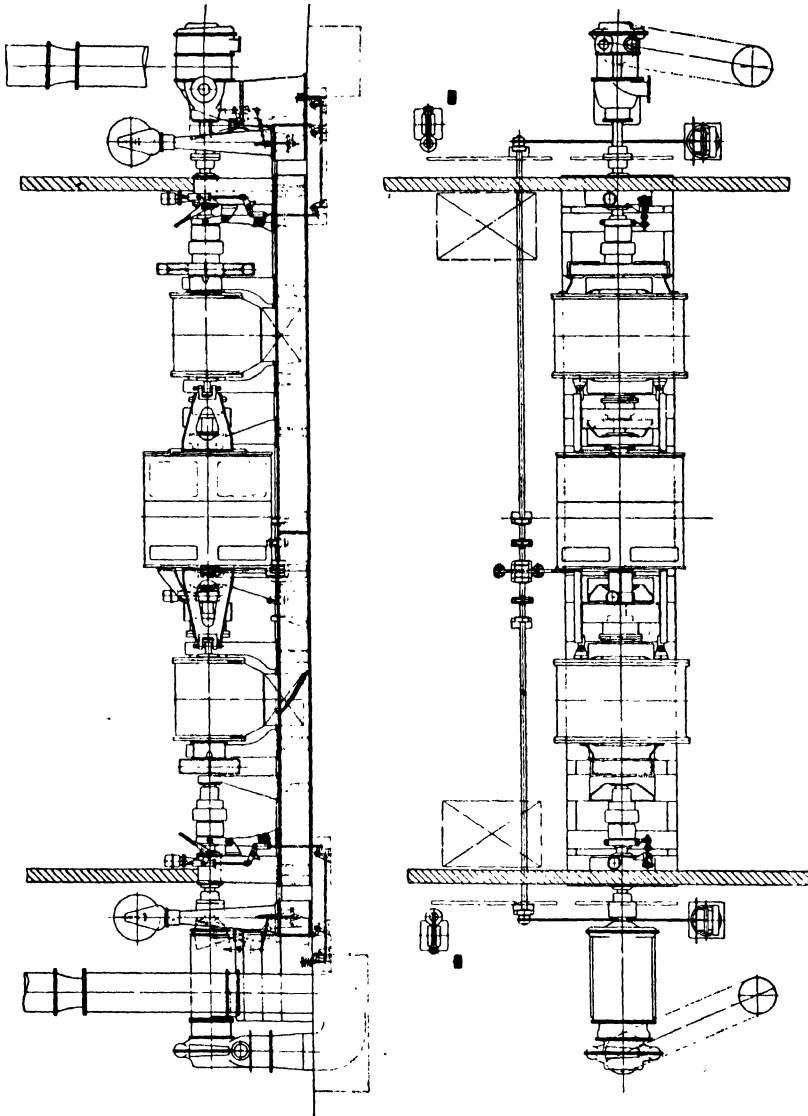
Typical layout of Heenan electric dynamometer for testing superchargers.
